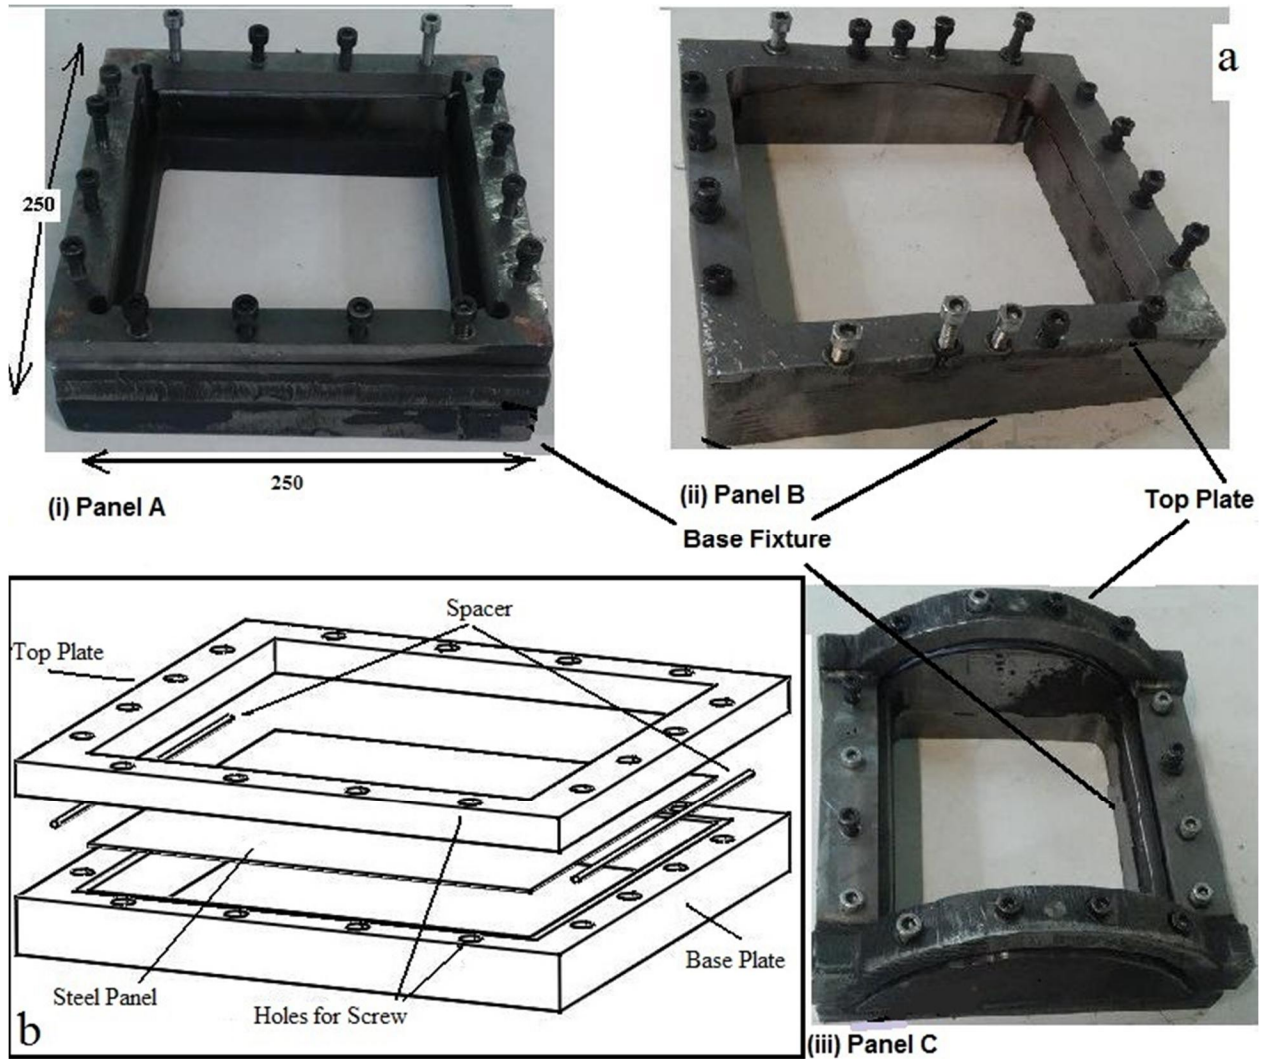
Loading fixtures, (a) Three fixtures, (b) flat fixture details
